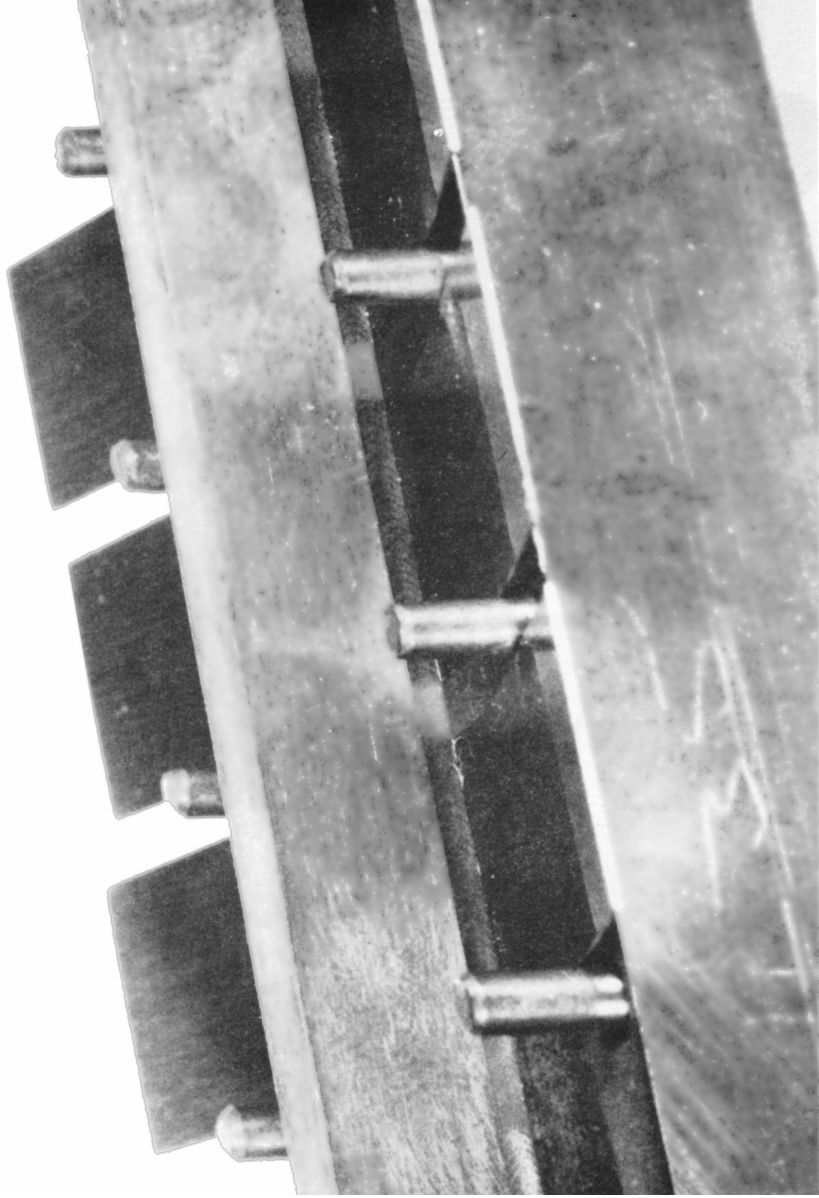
Form of Jig used for Knife-edge Loading of Strip
